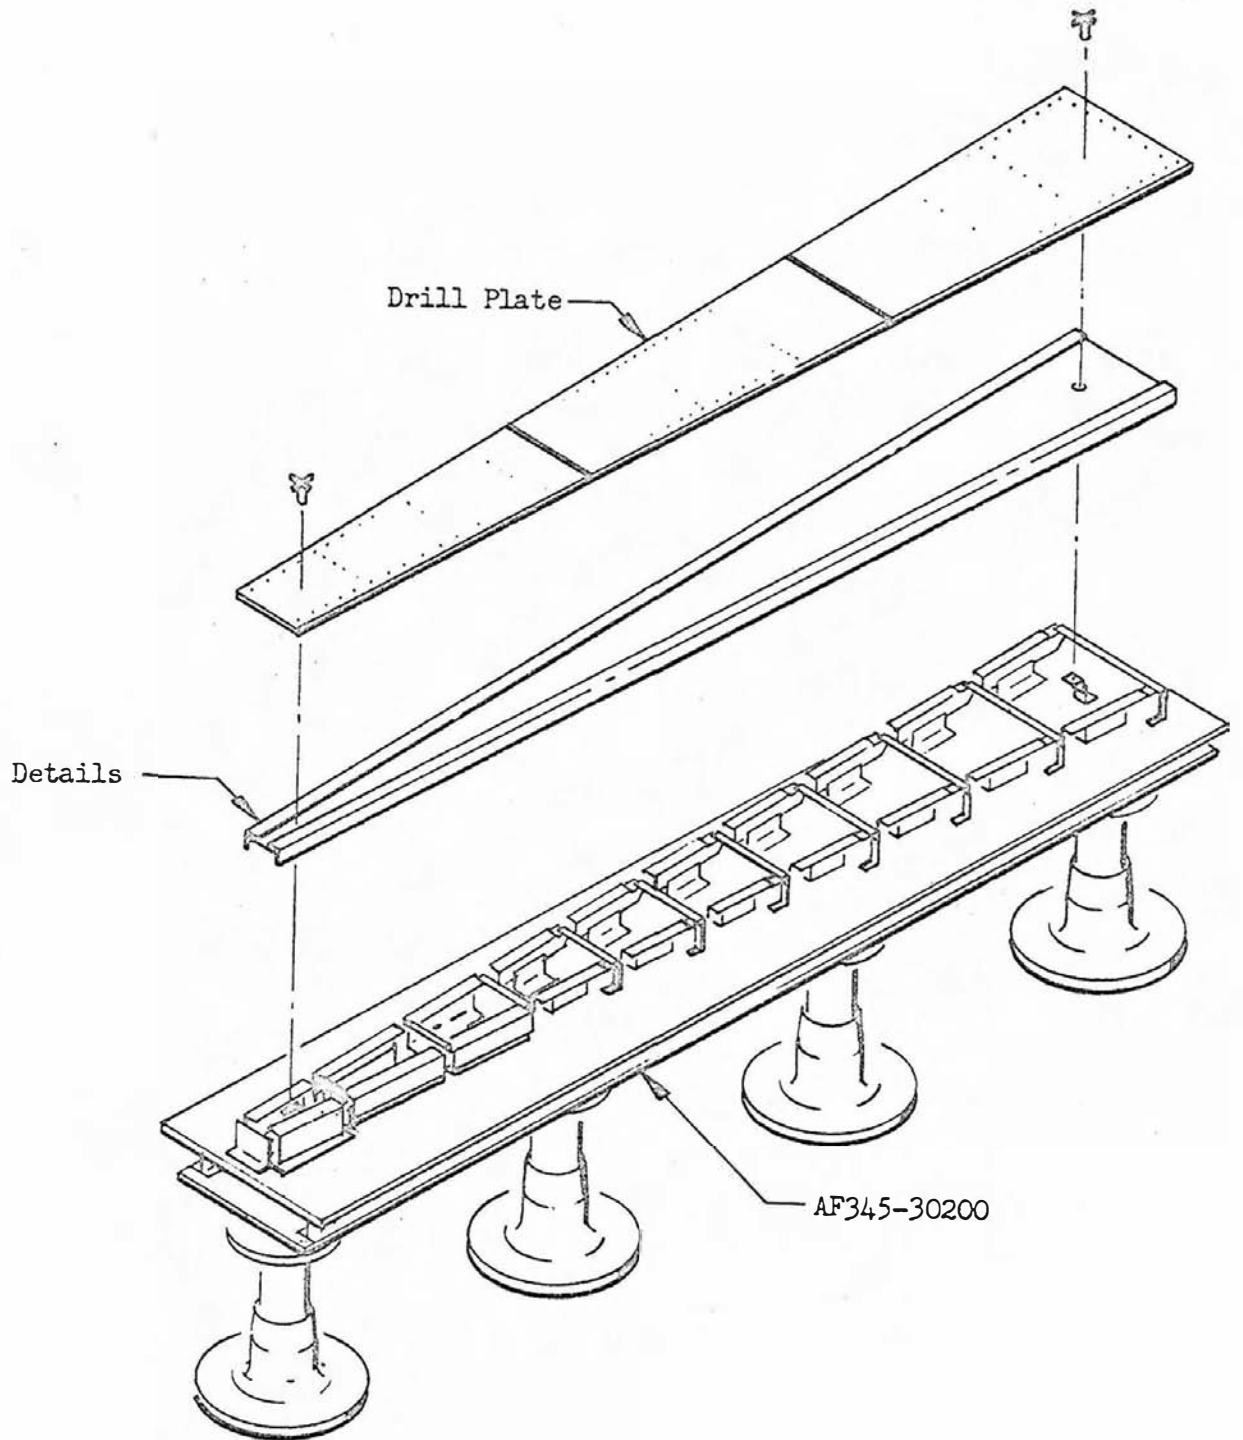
5. Trailing Edge Beam Assembly Fixture
